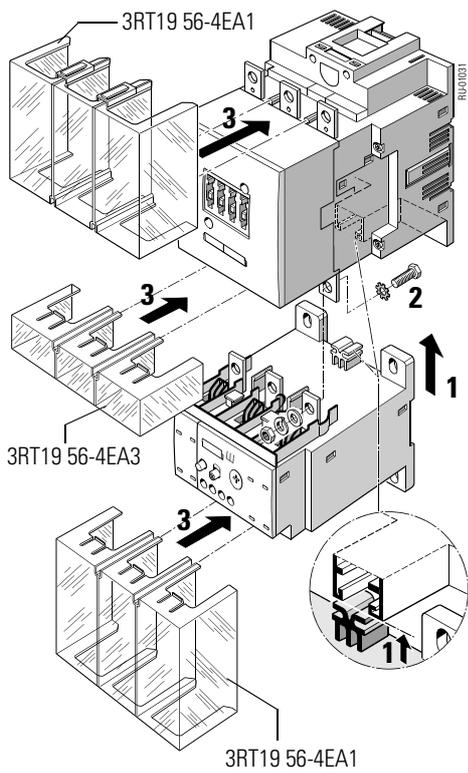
Mounting to the 3RT contactor/3RW3 softstarter
